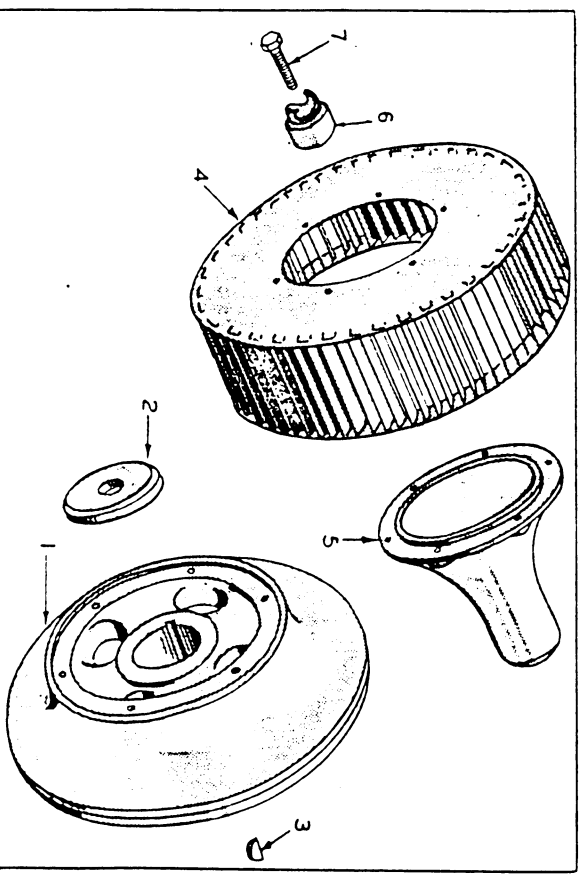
FIG. G - FLYWHEEL & BLOWER WHEEL GROUP
